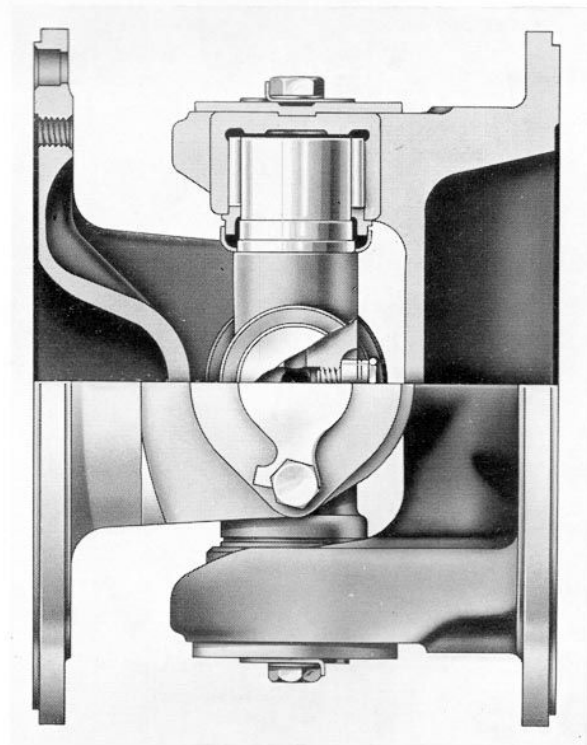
DOUBLE FLANGE YOKE ASSEMBLY
